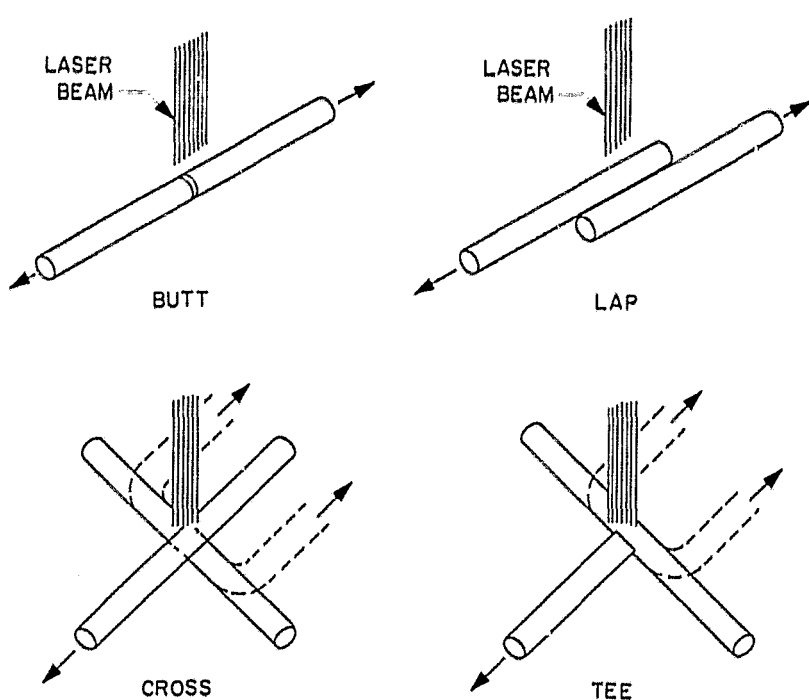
Basic configurations for wire-to-wire laser spot welds (from Ref. 14)
